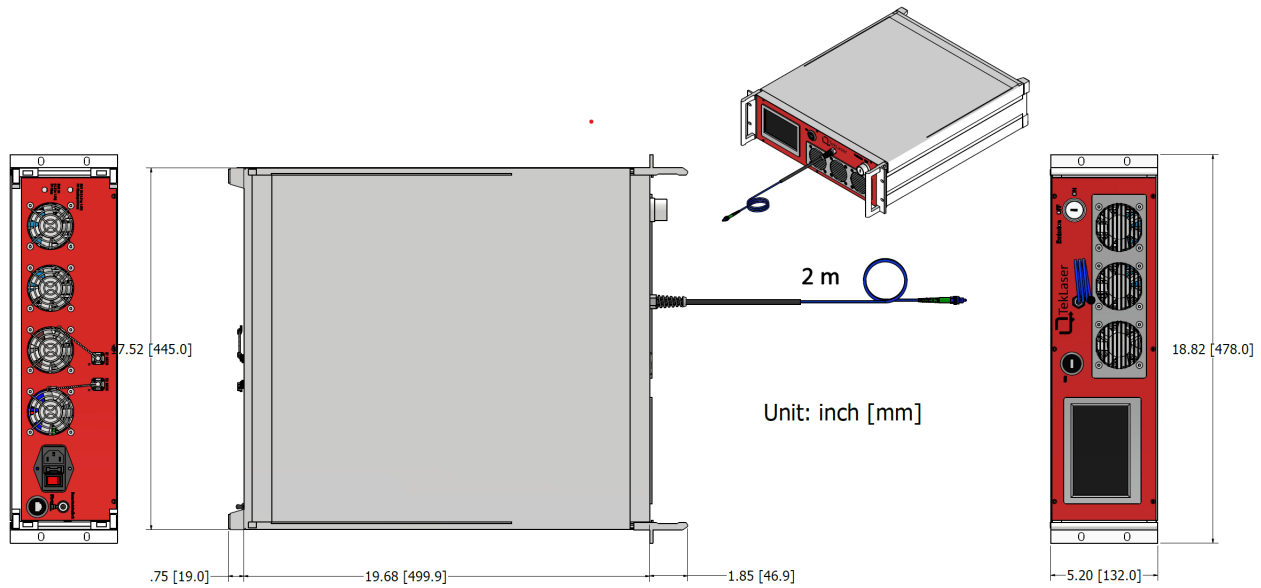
Mechanical dimensions of the 619 nm fiber laser.
